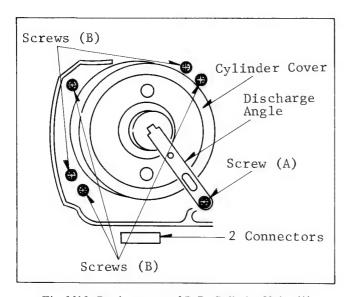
Replacement of D.D. Cylinder Unit-(1)
